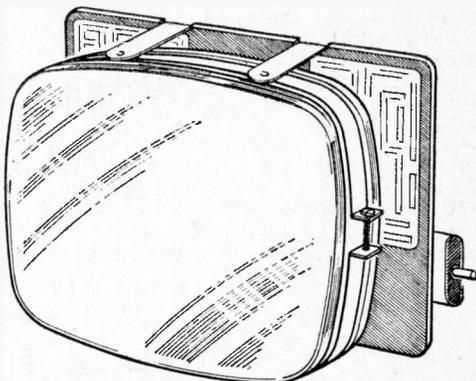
A typical chassis arrangement, with the tube held around the bowl by a clamping band.
